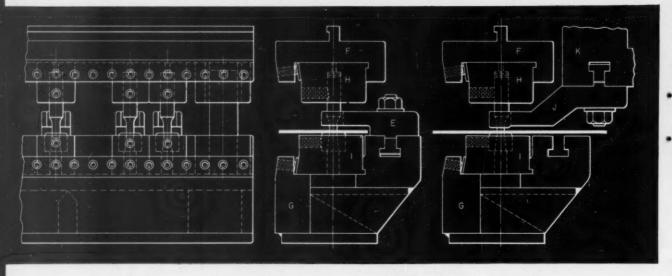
Punch- and die-blocks (H) and (I) are held in bolsters (F) and (G) by set-screws, permitting the center distances between dies to be easily adjusted. With strippers (E), holes can be punched about 2 inches from the edges of sheets, but with strippers (J) the work can be passed through the press brakes.
